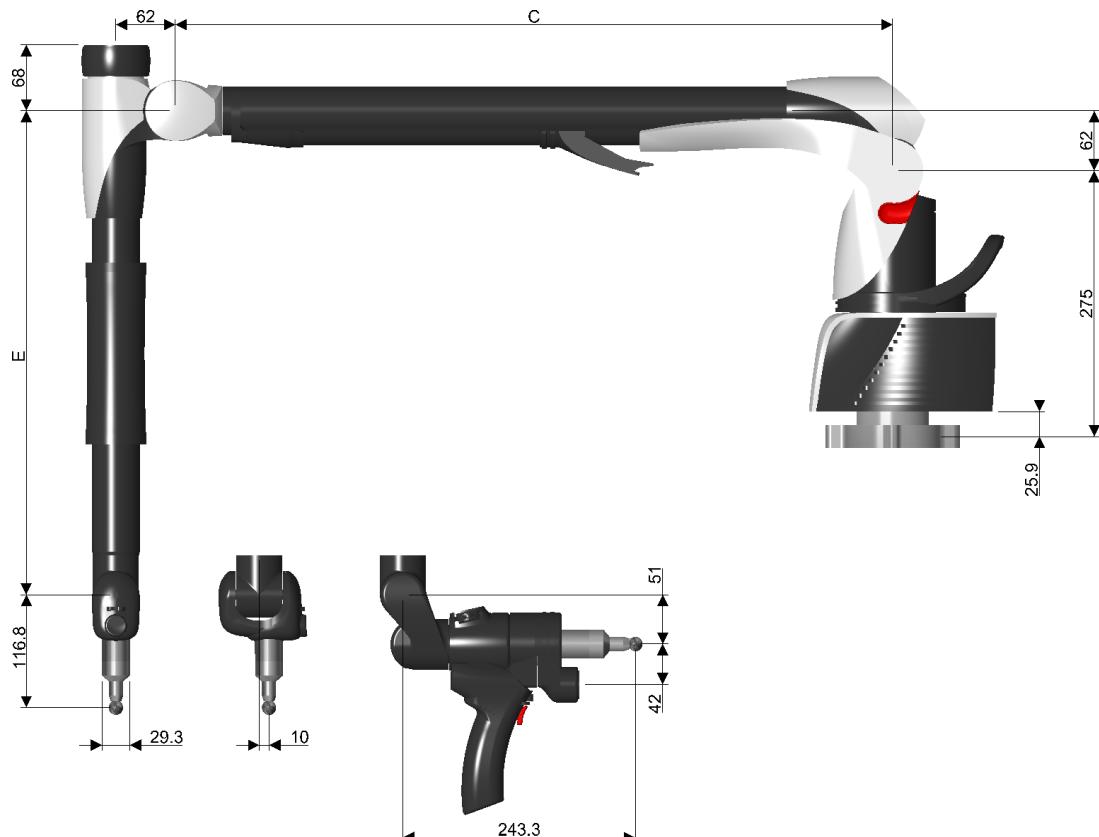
Absolute Arm 2.0 to 4.5 dimensions (mm)
